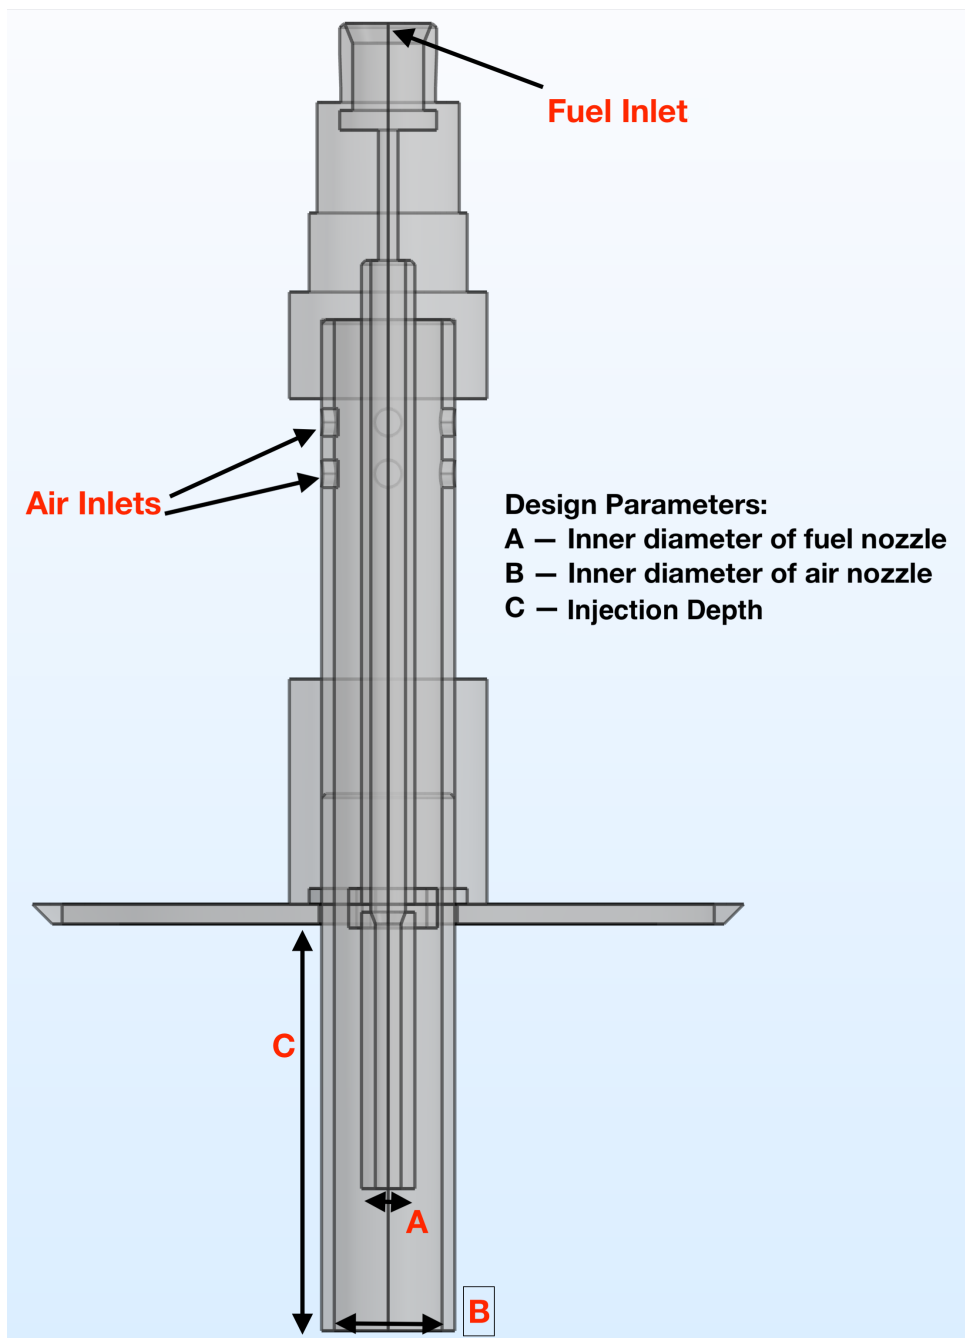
3D Burner geometry labeled with design parameter created using COMSOL CAD Modules®
